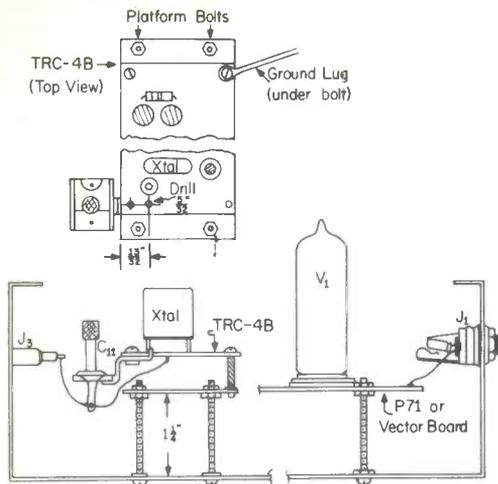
Mounting of C-11, the TRC-4B converter board and the transmitter board.
